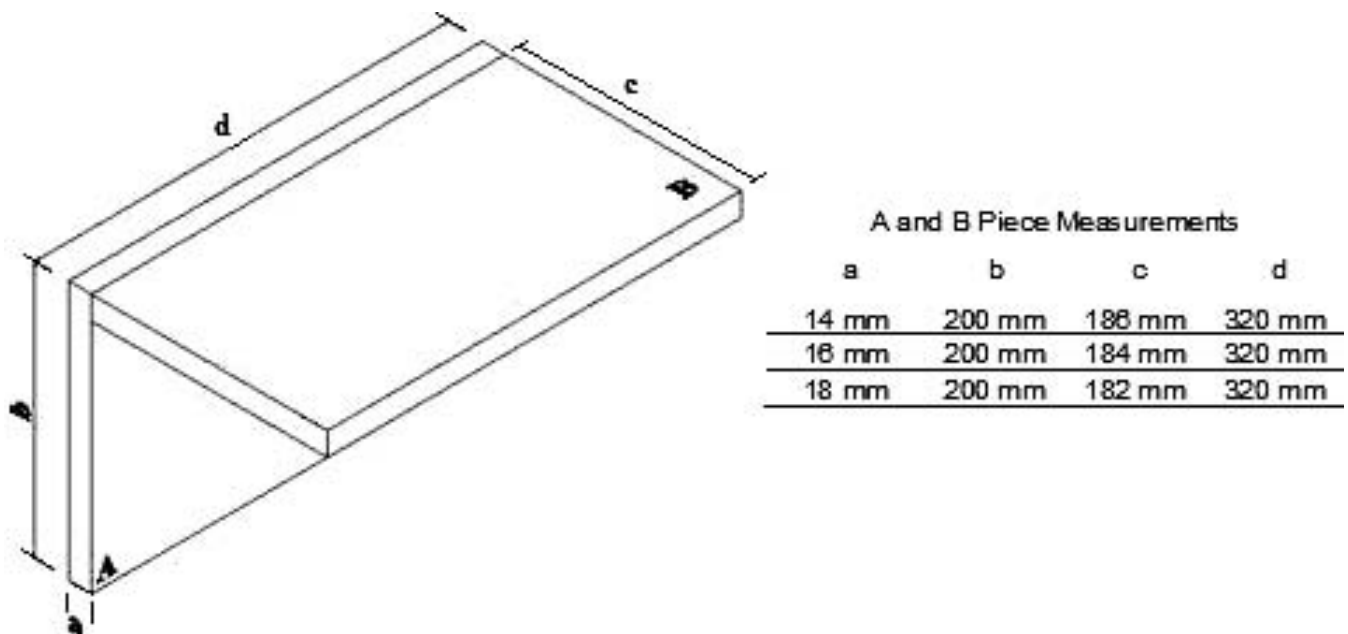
The perspective appearance and measurements of the L-type joining test specimens.
